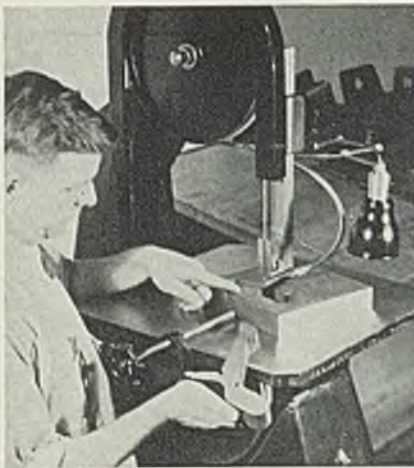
A starting hole in this blanking die permits passing the saw through prior to the brazing operation
